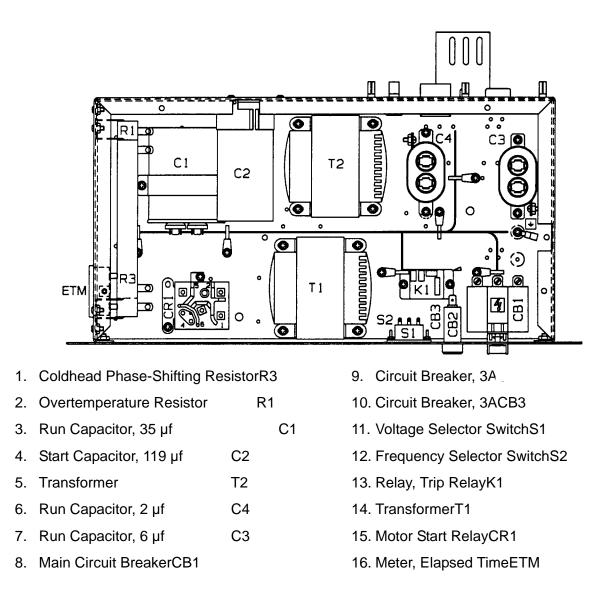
Components in the Electrical Control Chassis of the 8200 Compressor Single-Phase RC Configuration
